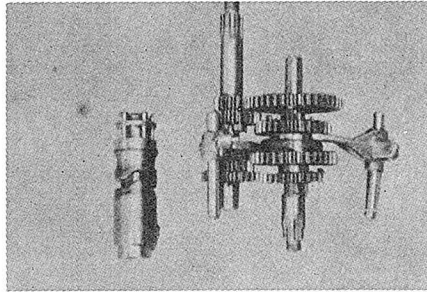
Transmission and shifter assembly should be installed in left engine case as a unit.
